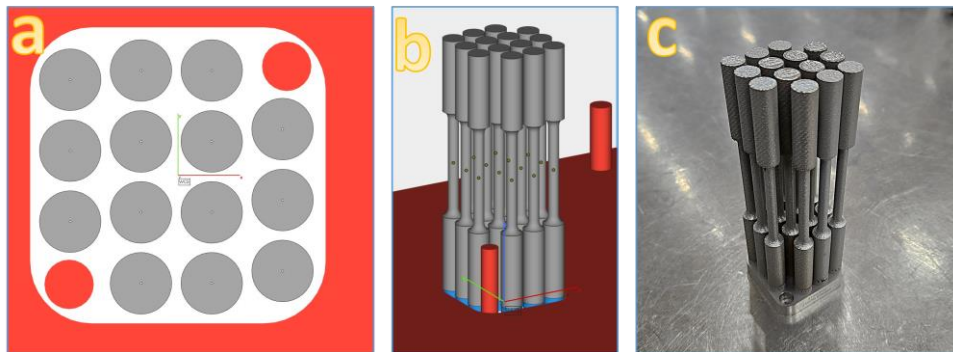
SLM Printed 14 cylindrical Samples with different parameters set. (a) Top view of CAD design, (b) 3D view of CAD design, and (c) Manufactured samples for tensile test.
